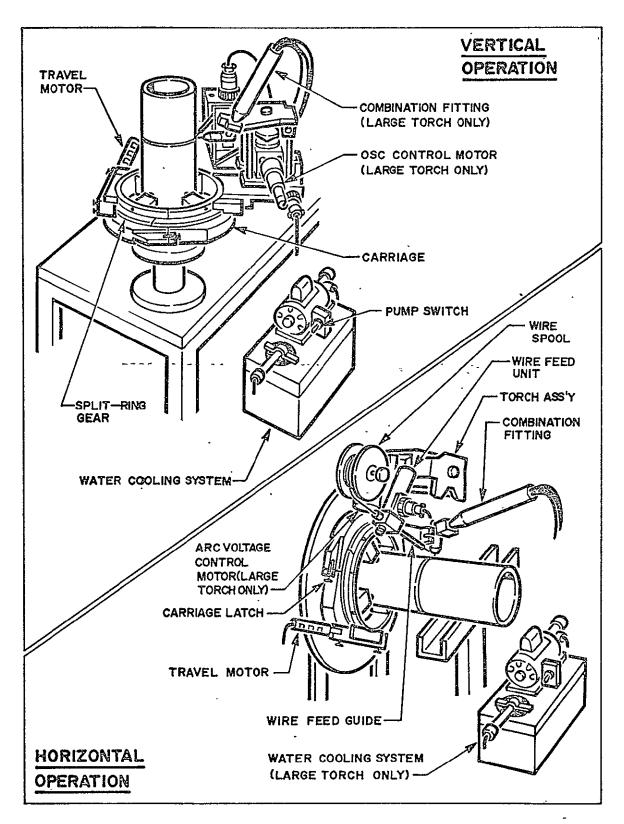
Large Carriage and Torch Assembly - Vertical and Horizontal.
